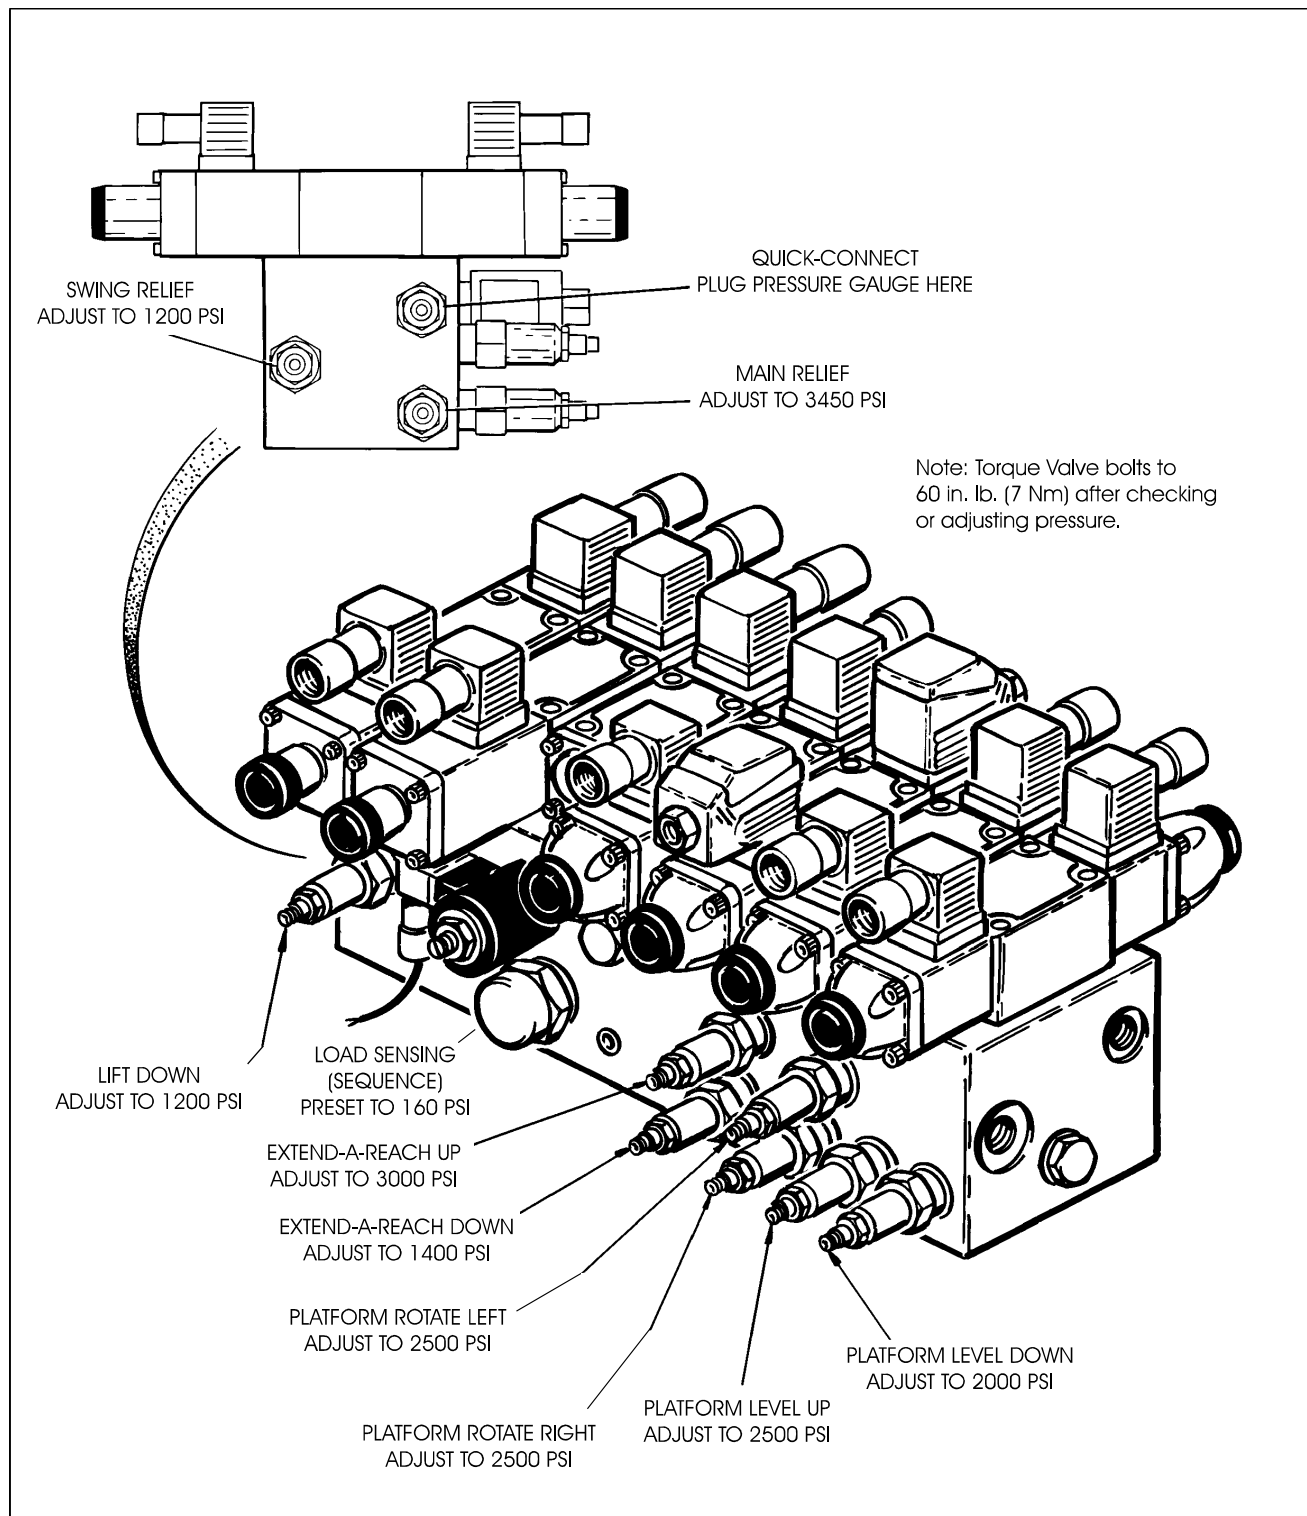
Pressure Setting Adjustments - Main Valve - Machines Built Before S/N 38697
